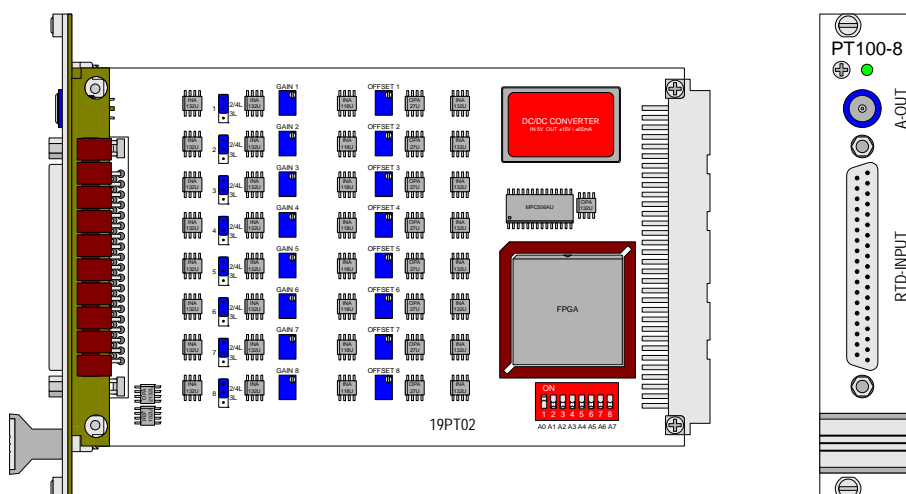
Pro-PT100-8-D REVA: Board and front panel
